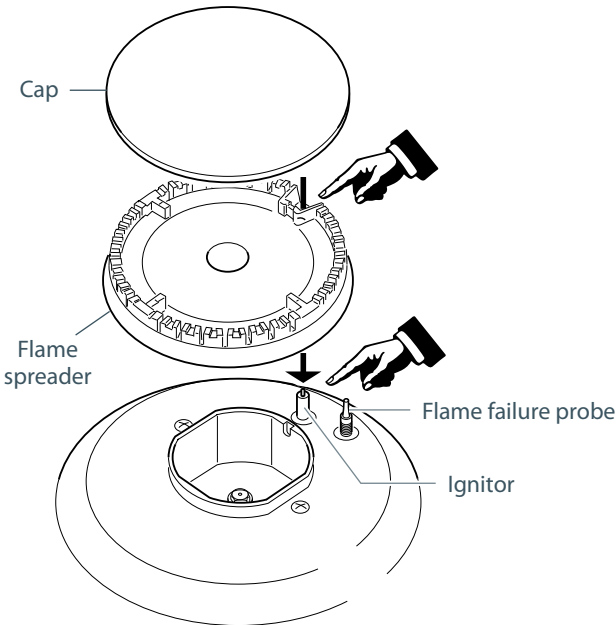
Correct line-up of the auxiliary and semi-rapid burner parts
